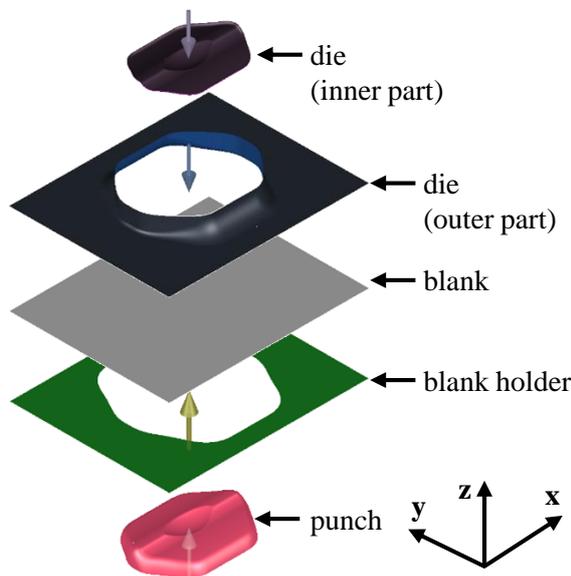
Surfaces of the deep drawing tool for the finite element simulation.
